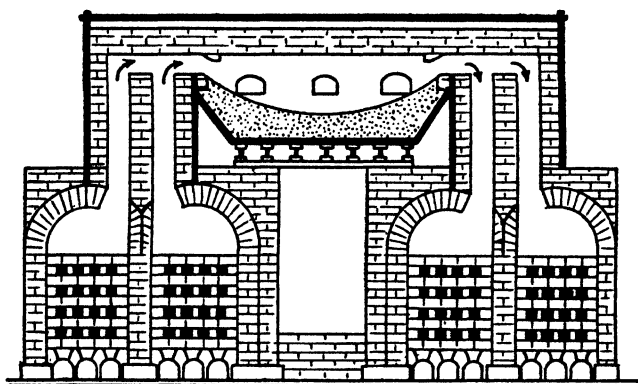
THE OPEN-HEARTH PROCESS OF MAKING STEEL
